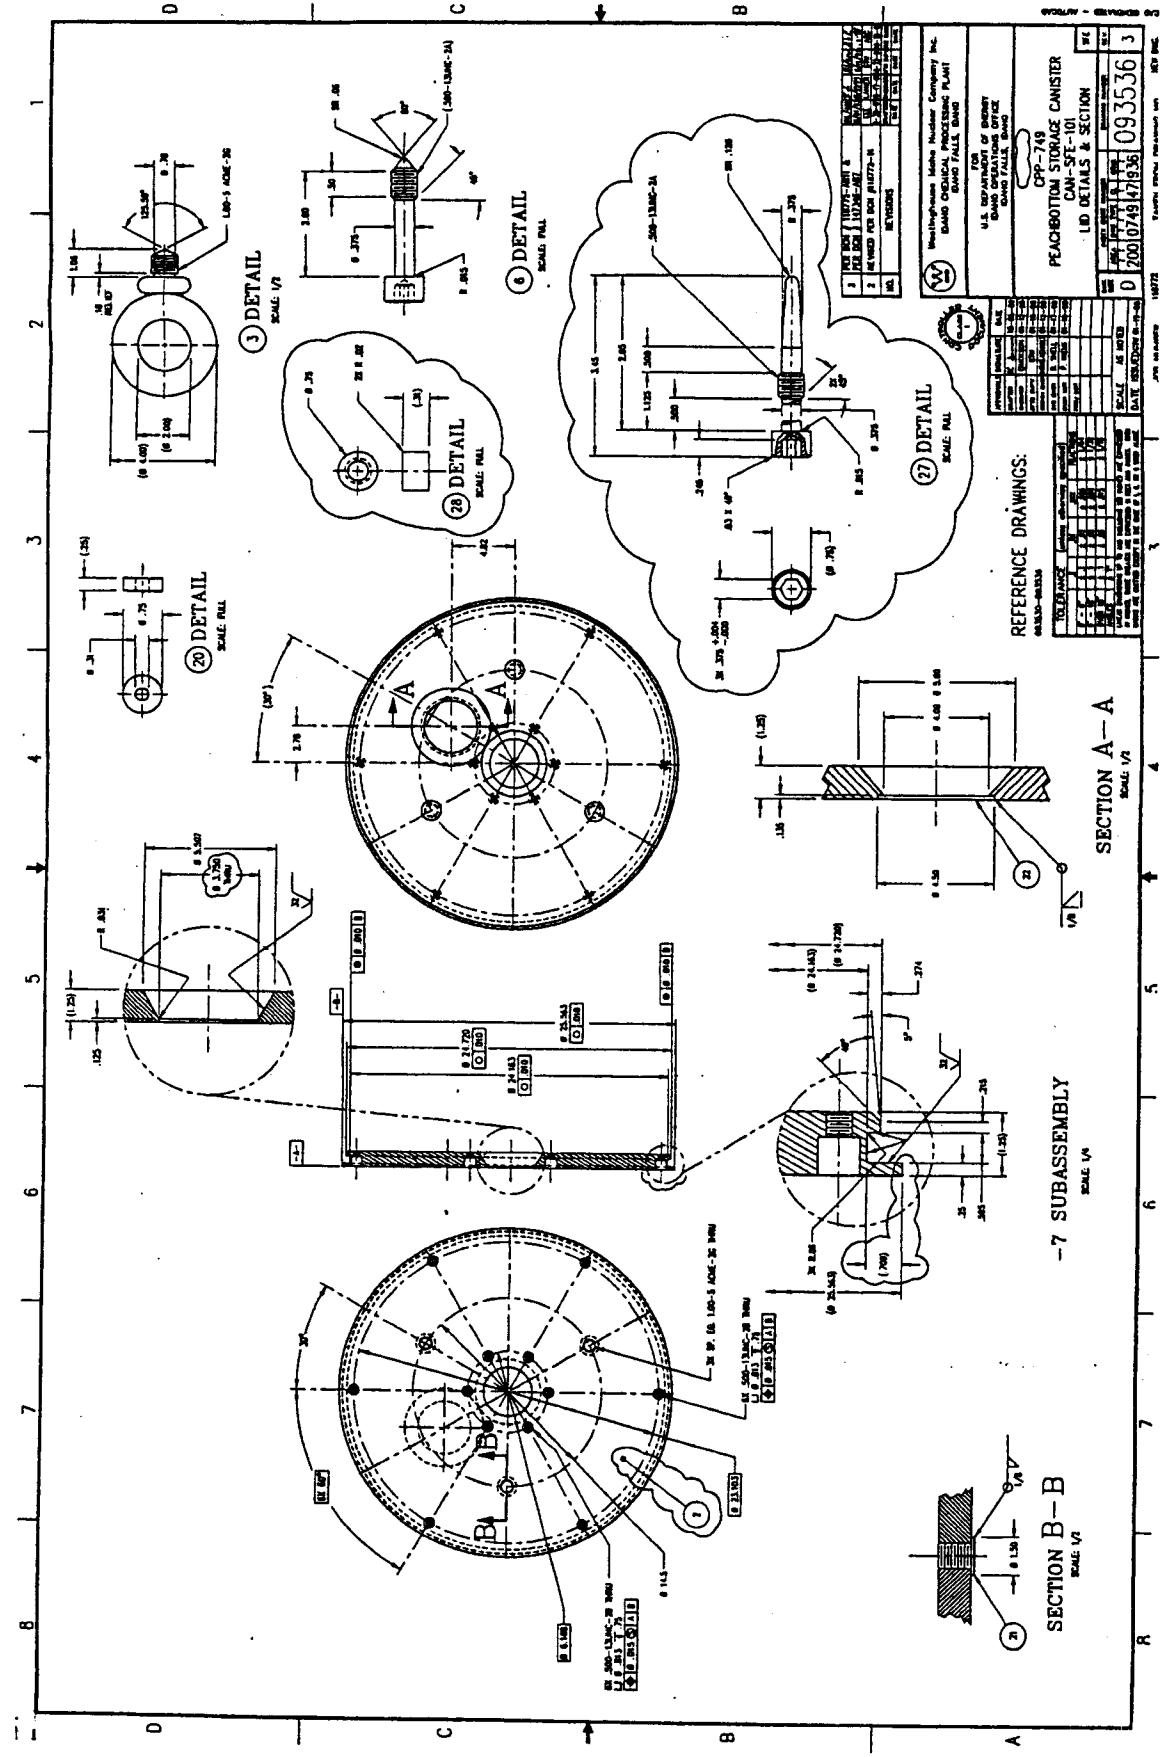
CPP-749 Peach Bottom Storage Canister CAN-SFE-101 Subassembly & Details - 1
